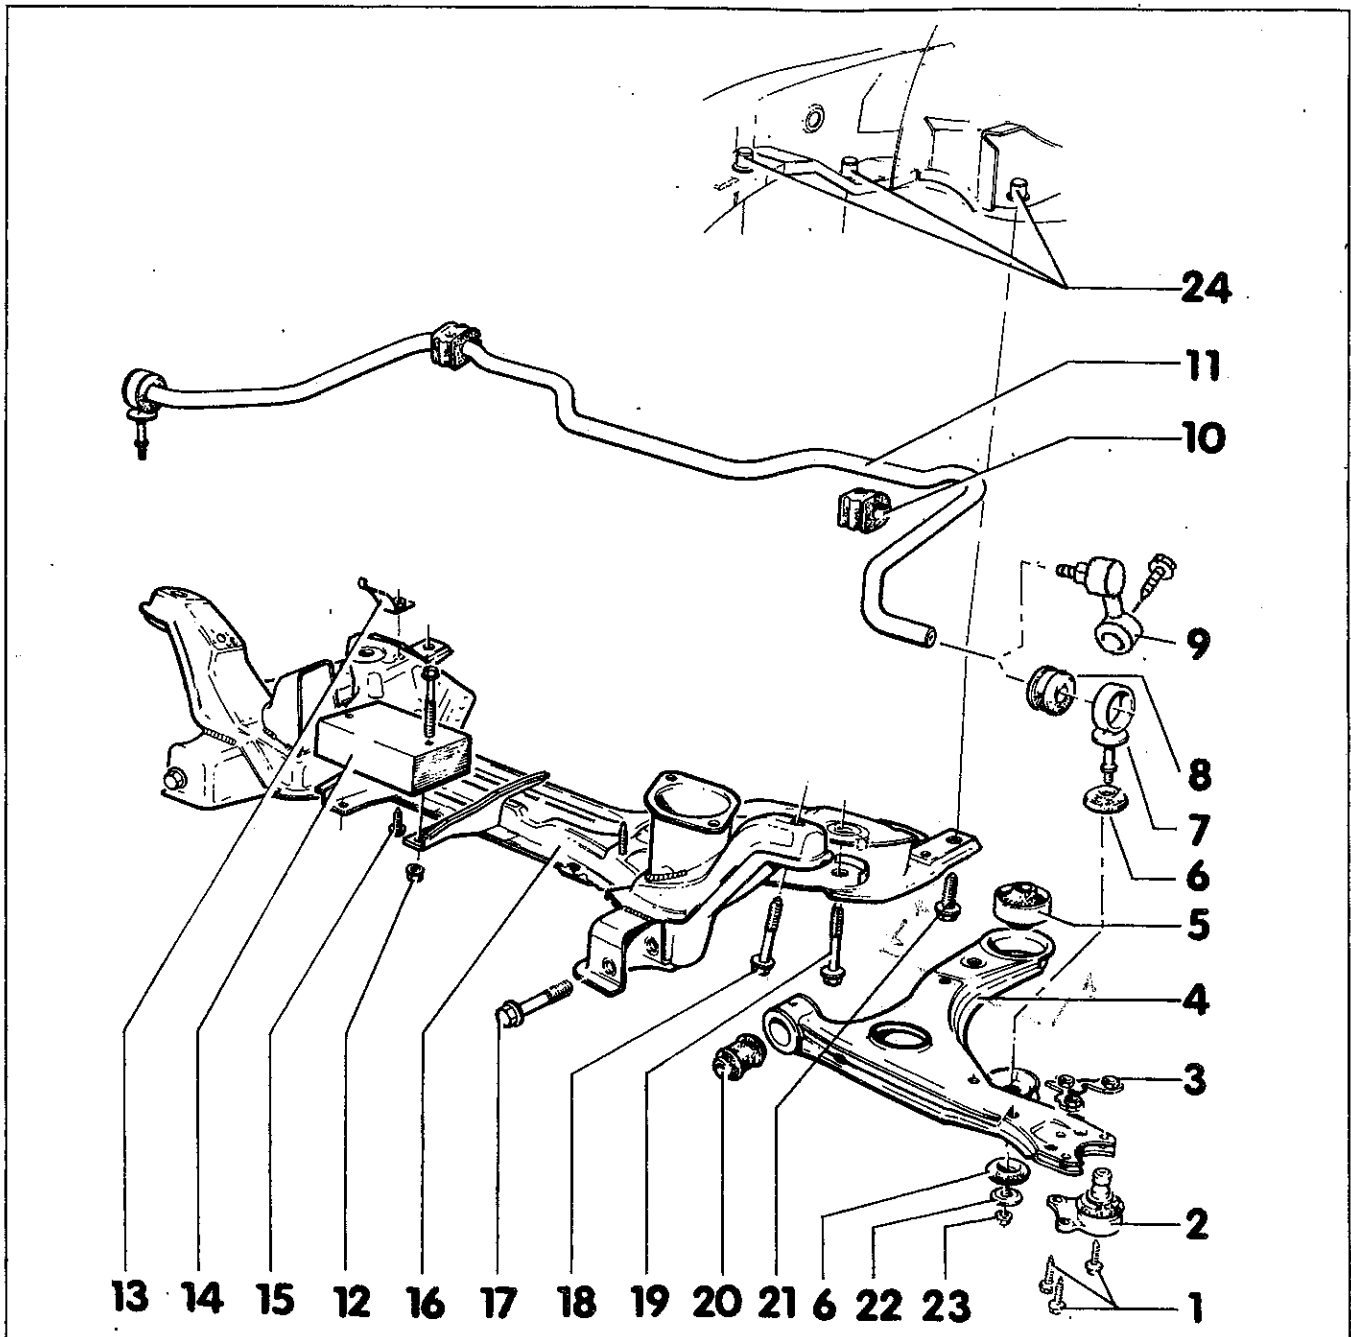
shows an exploded view of the front subframe and related parts. The control arm is mounted in replaceable rubber bushings that are subject to wear. The subframe supports the weight of the engine/transmission assembly. Note that the engine assembly must be supported before removing the subframe.
